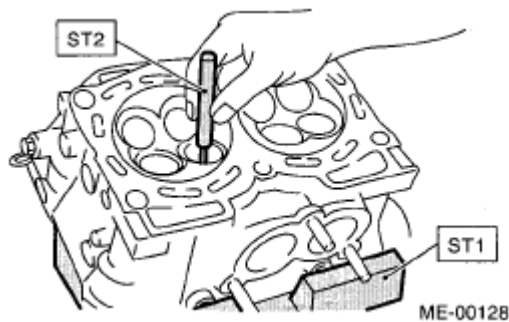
Identifying Cylinder Head Table And Valve Guide Remover
